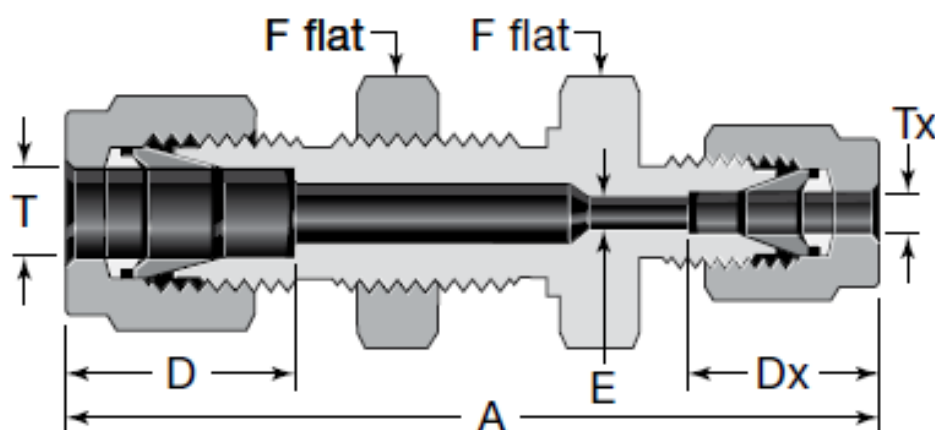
Bulkhead connector used for the pitot-tube to pass through the aircraft fuselage
